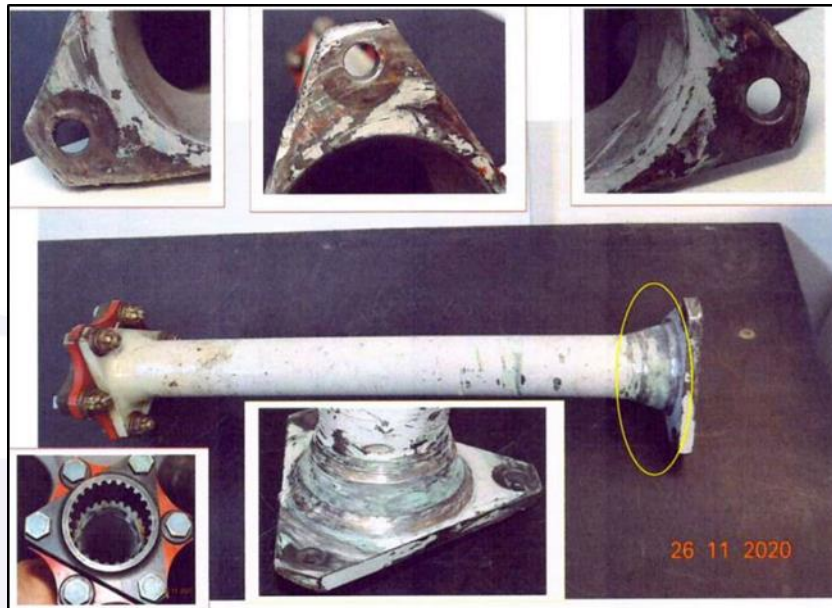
View of the power output shaft from the freewheel to the Main Gearbox (MGB), showing scuff marks.
